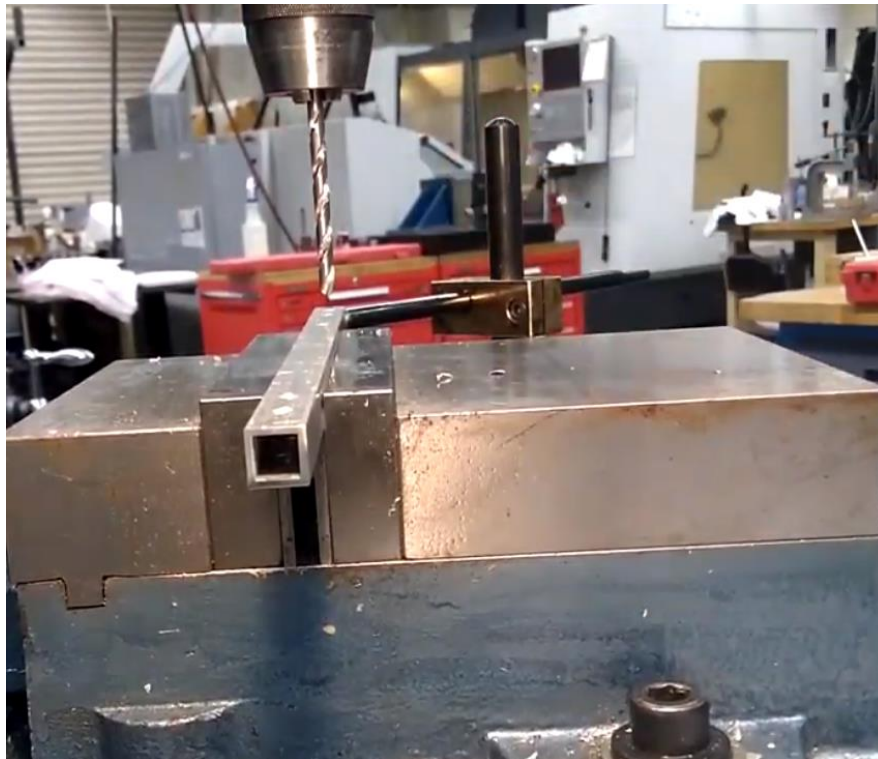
Using a Milling Machine to Drill Holes in the Arms of the Drone
